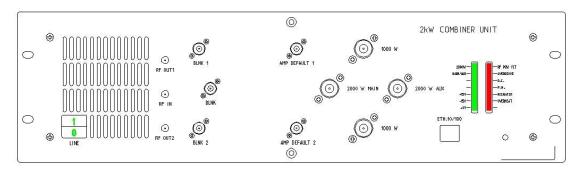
BLA2000-I E Combiner Front Panel Design
